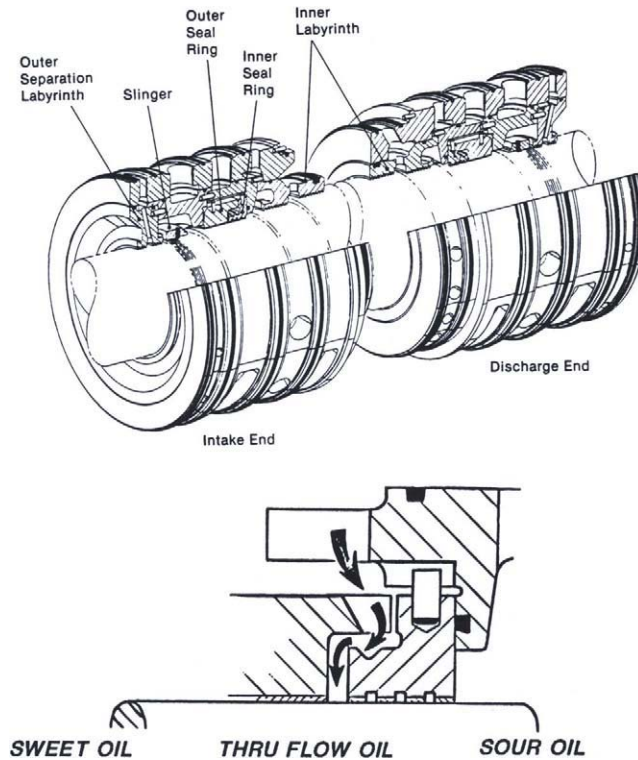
Bushing seal – top: oil film seal; bottom: seal oil flow (Courtesy of Dresser-Rand)
